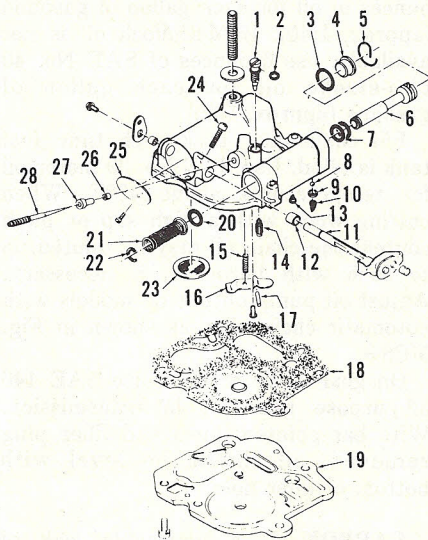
Exploded view of later Model "W" series carburetor. Refer to Fig. MC6-4 for view of early model.
